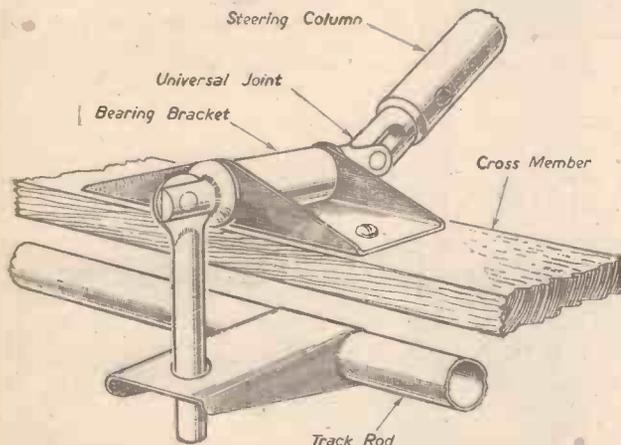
Details of steering column, universal joint, and track rod linkage.
